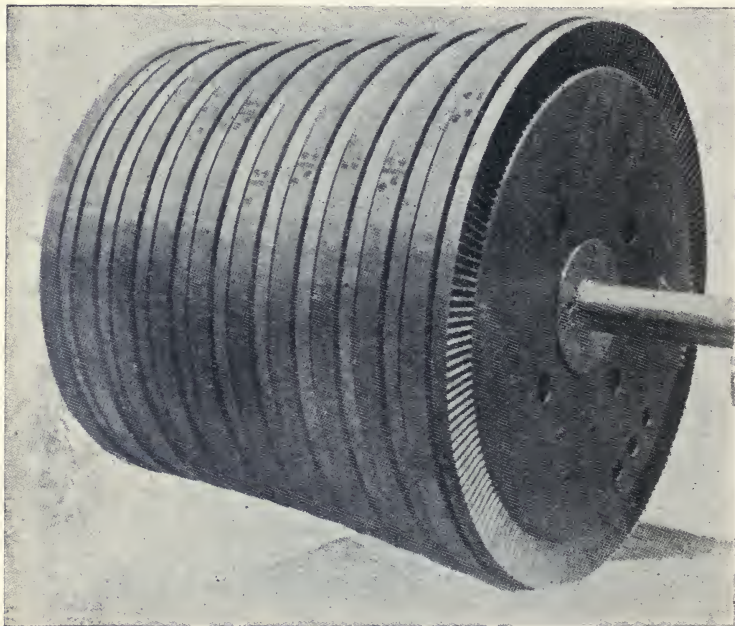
COMPLETE ROTOR, RATEAU STEAM TURBINE.
